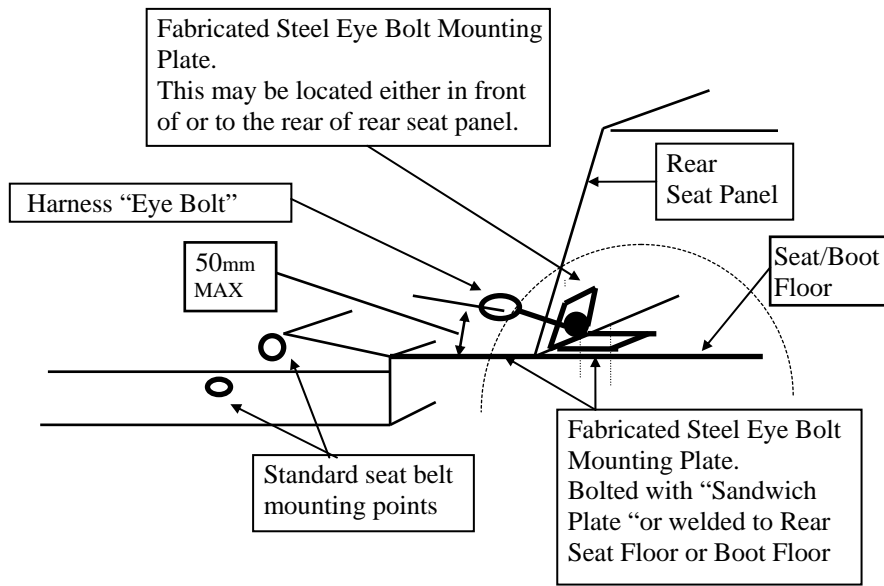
HARNESS STEEL EYE BOLT MOUNTING PLATE
